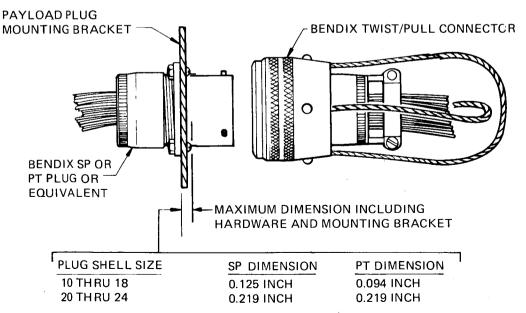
PAYLOAD UMBILICAL PLUG BRACKET DIMENSIONS
